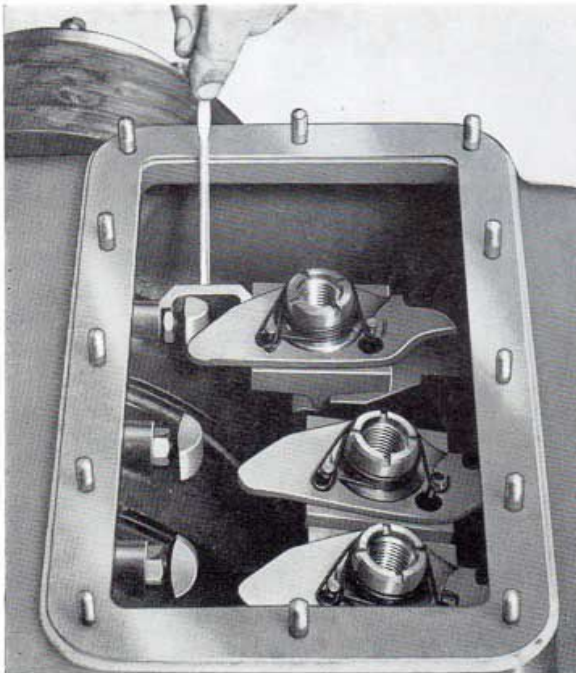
APPLICATION OF TOGGLE SETTING GAUGE.
